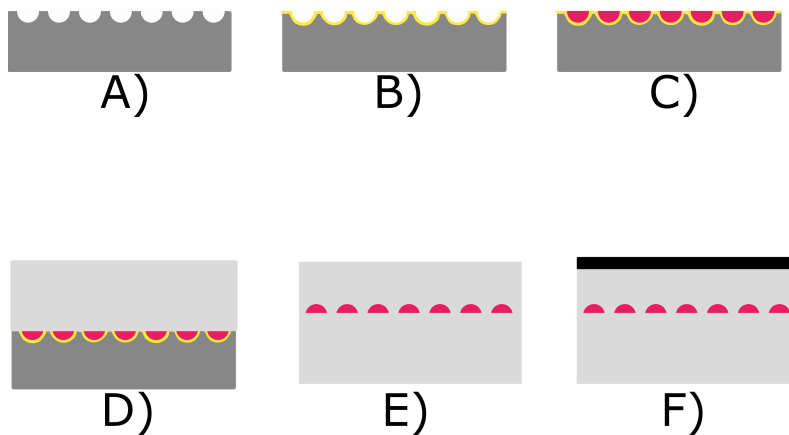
An illustration of the steps involved in forming the traction layer. Step A) shows a two-dimensional cross section of the $220\text{ mm} \times 300\text{ mm}$ CNC machined mould used to form the layer, with a fine coating of wax deposited in step B). In step C), Rhodamine-B doped polydimethylsiloxane has been poured over the mould to fill the debossed hemispheres and the excess elastomer scraped away, so that only these regions contain elastomer. After curing, a 2 mm layer of clear PDMS was then placed over the top in D). The sheet was then carefully removed from the mould, and another clear layer added over the top, to seal in the dots, in E). Finally, in F), a thin ($<0.1\text{ mm}$) layer of PDMS doped with black silicone dye was poured over the top, to block passive light sources and give the dots a uniform background for imaging. All curing steps were undertaken at room temperature and pressure, over 48 hours, and sealed in an air-tight box to prevent contamination from dust/debris.
